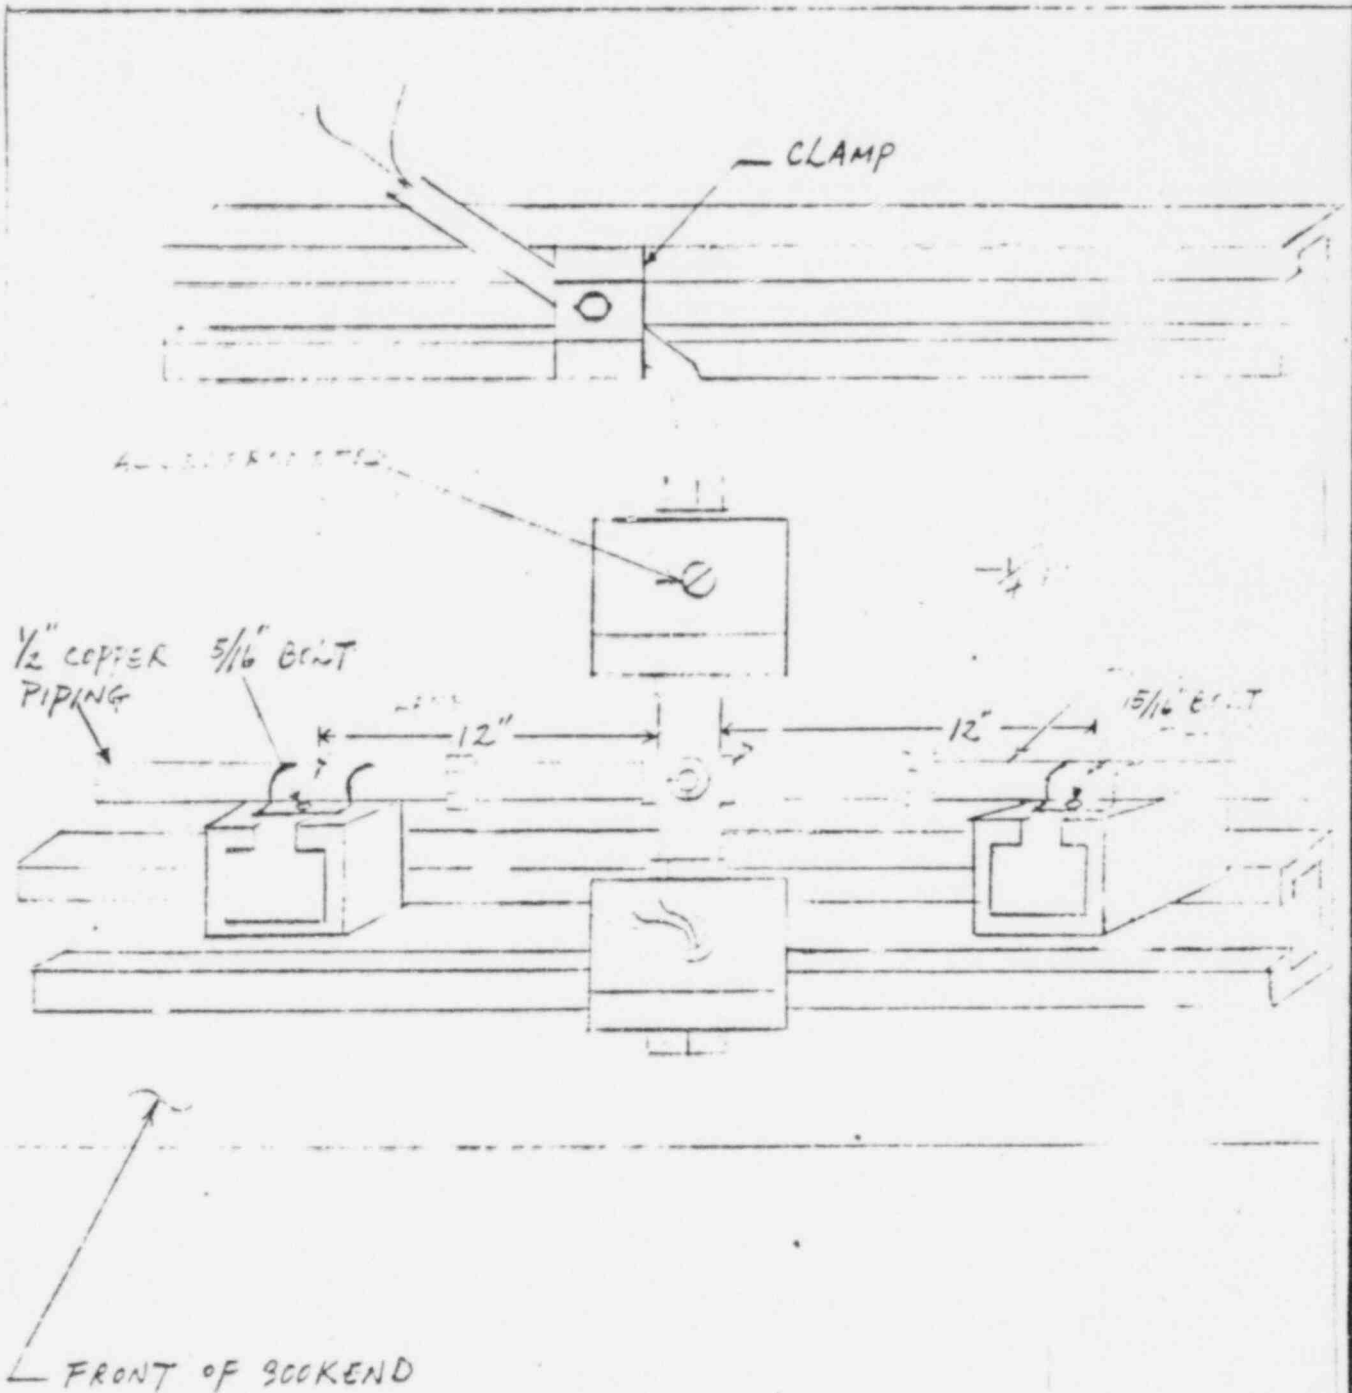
TEST SPECIMEN MOUNTING AND ACCELEROMETER LOCATION
